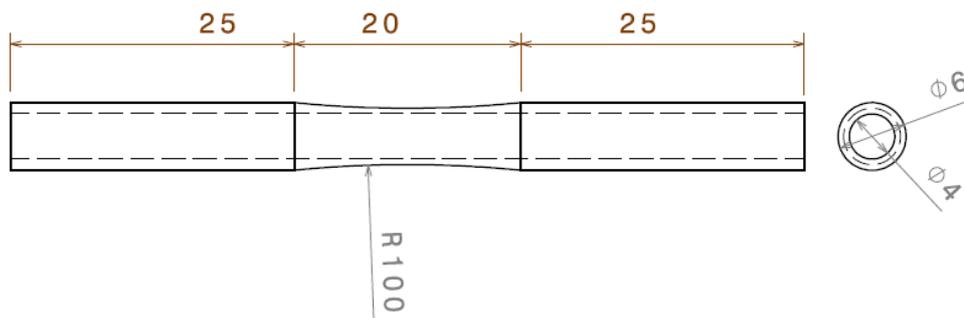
Dimensions of the tubular specimen for tensile tests (in mm)
